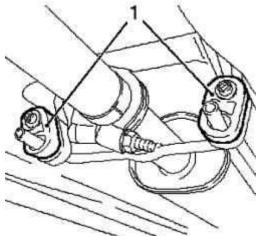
Mounting the front of the exhaust pipe: 1 - rubber bearing
